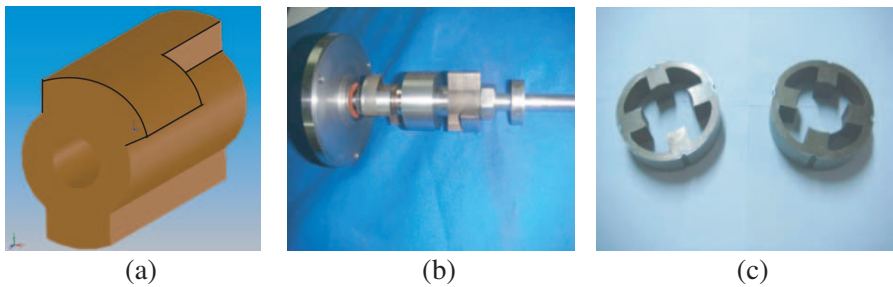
(a) Rotor shape. (b) Actual rotor assembly. (c) Stator laminations.
